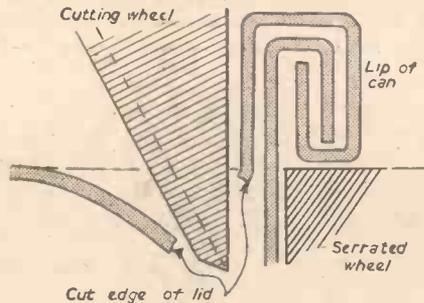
Enlarged detail from Fig. 5, showing how cut edge of lid is flattened against side of can.
